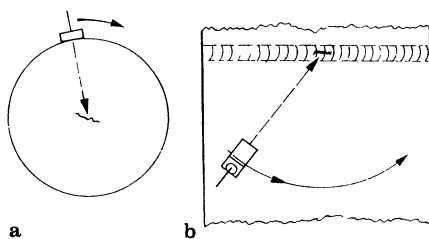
Change in the direction of irradiation. a On cylindrical specimens with central defect; b on a welded seam
